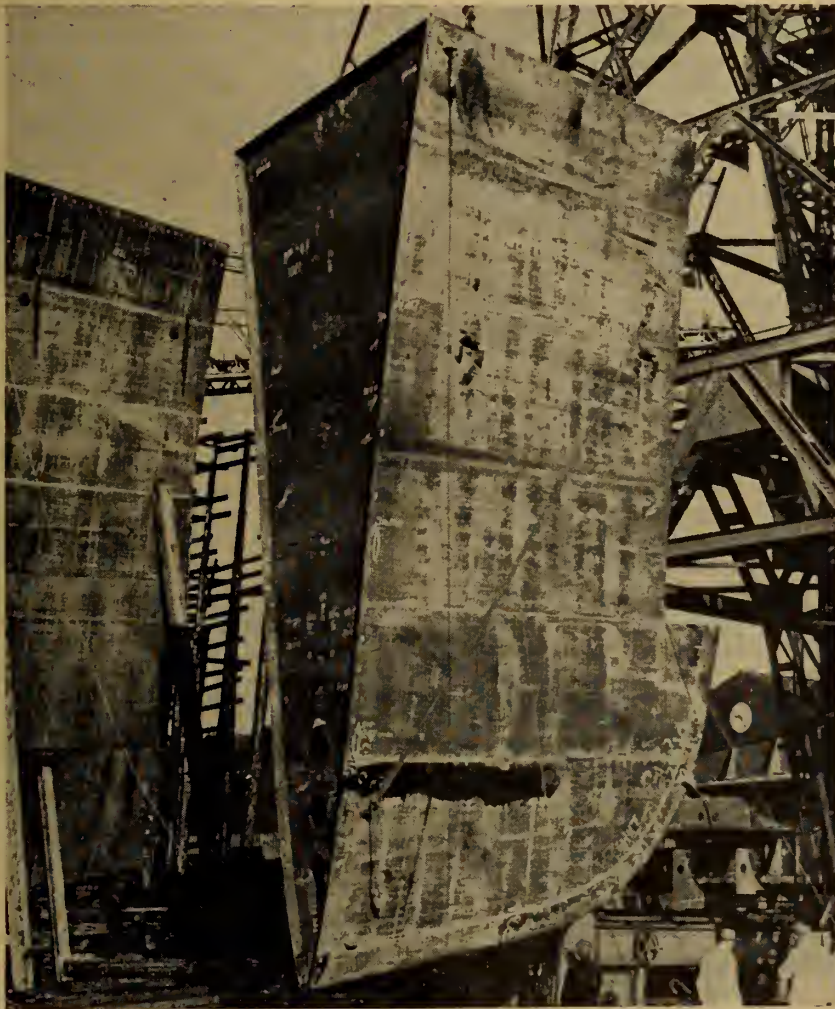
A 50-ton welded bow unit for passenger liner.
